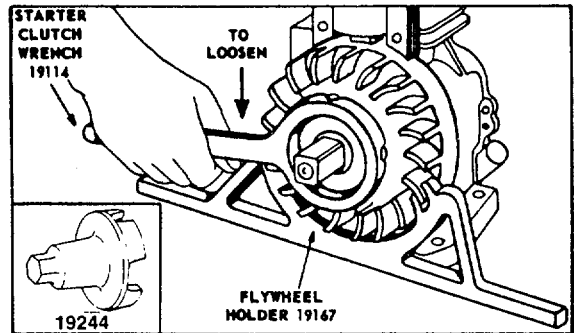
Loosening Flywheel Rewind Starter and Wind-Up Starter Engines
